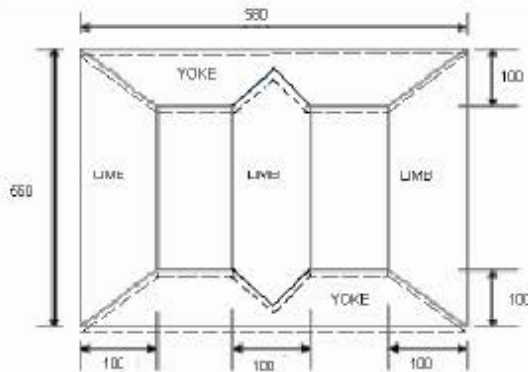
Dimension (mm) of 23° T-joint 100kVA transformer model
